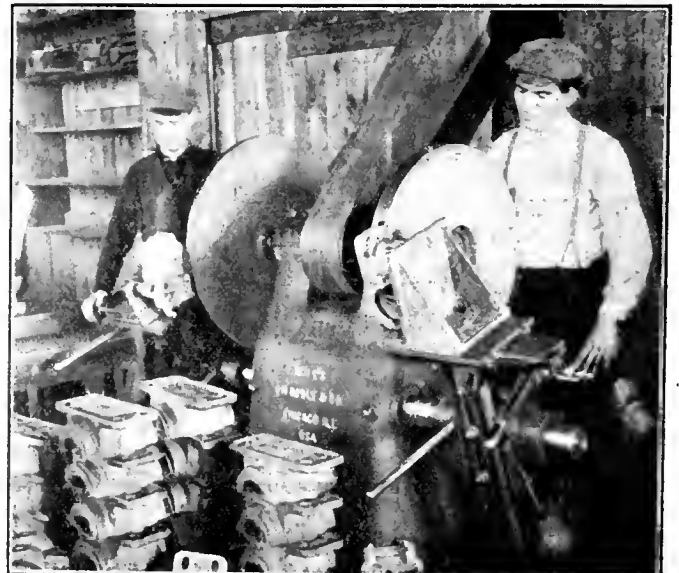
GRINDING CAST IRON PILLOW BLOCKS AND CAPS.
